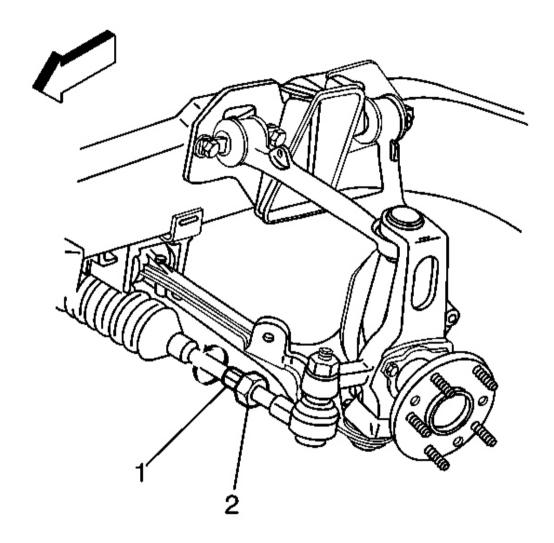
Jam Nut & Inner Tie Rod Courtesy of GENERAL MOTORS CORP.
